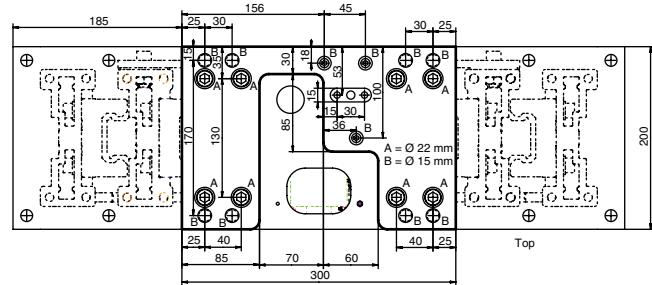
Dimensions of upper compensation plate (All dimensions in MM)
